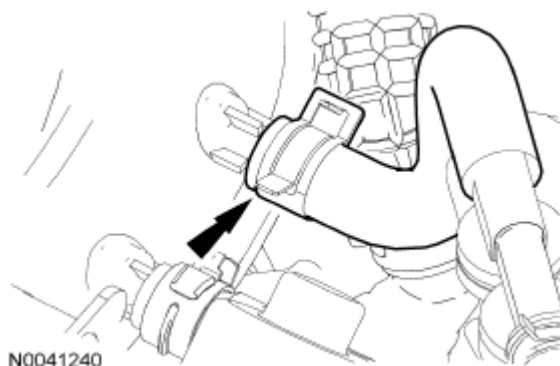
Locating Vacuum Hose To Intake Manifold Clamp
